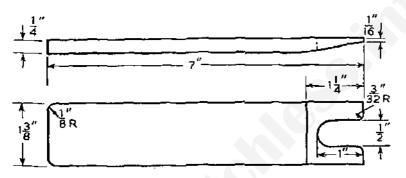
TOOL FOR REMOVING SPROCKETS FROM MAGNETO AND DYNAMO.
